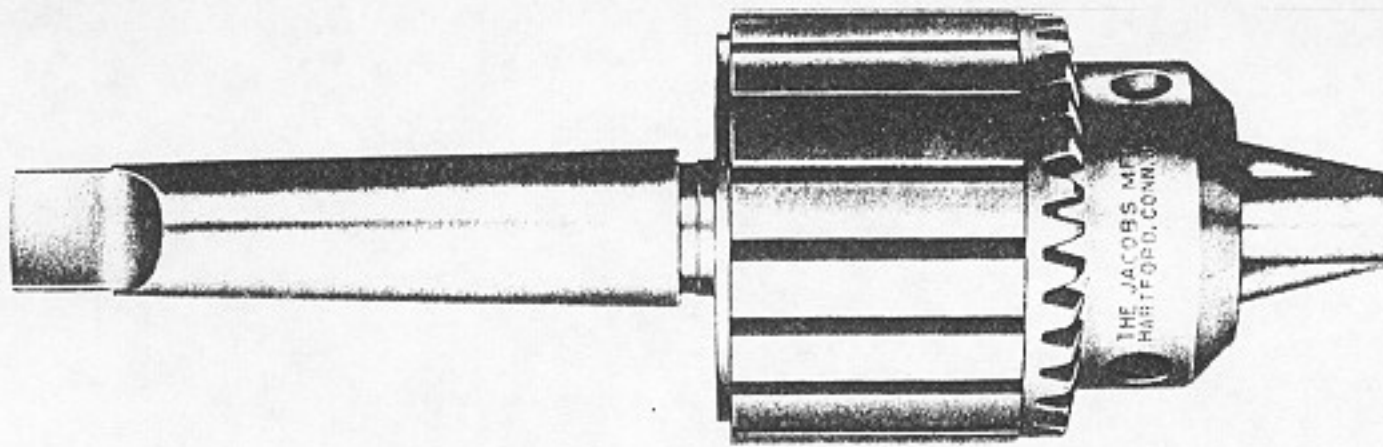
In use, the taper shank of the drill chuck is inserted into the tapered socket of the drill press or lathe. (Courtesy Jacobs Mfg. Co.)
